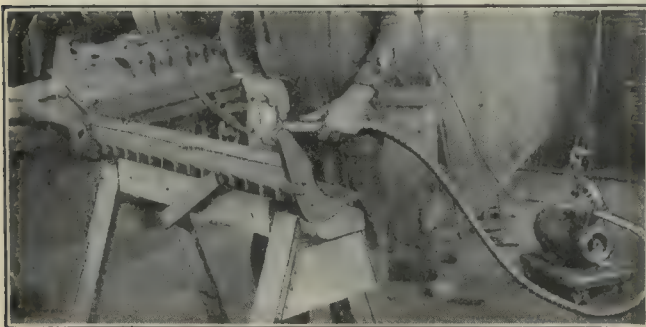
SMOOTHING A CASTING BEFORE MILLING
